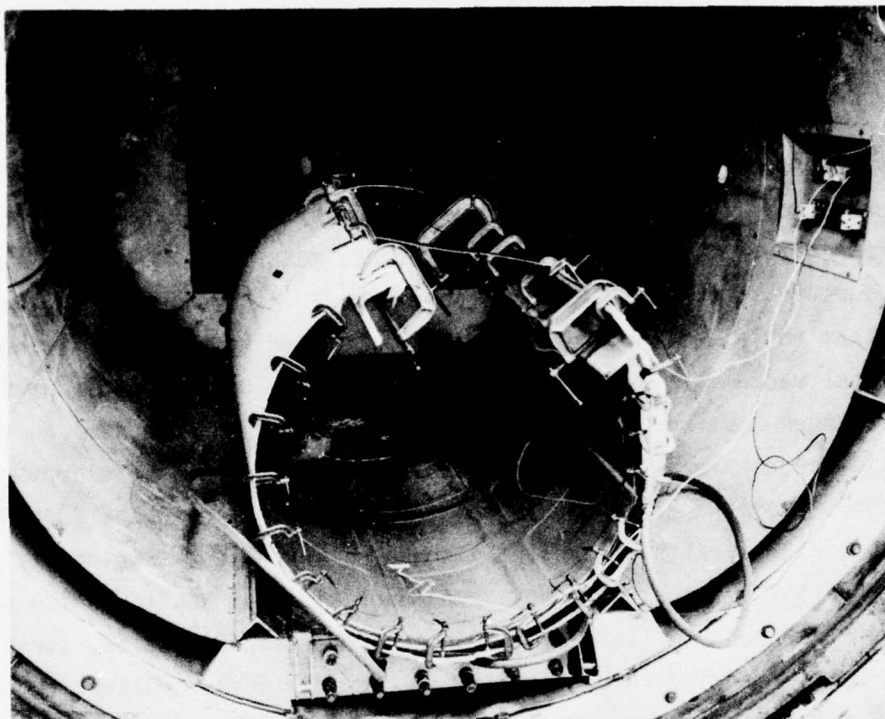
Fusing of Gr/Ps Stock Sheets Into Sub Component No. 2 Skin and Other Parts
